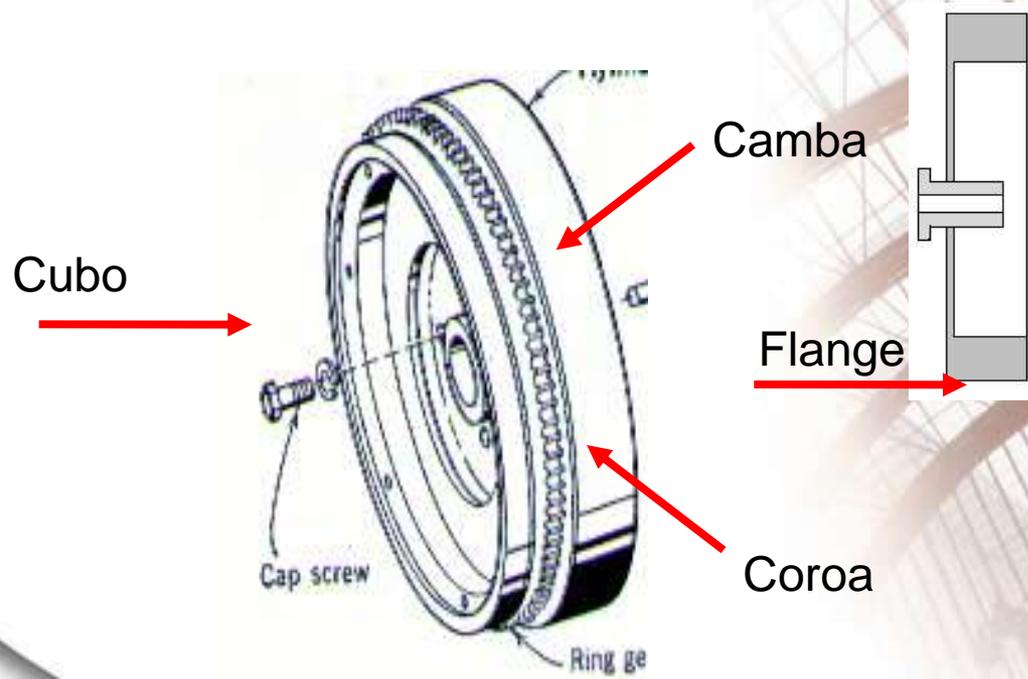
Crankshaft, flywheel, and related parts (Allis-Chalmers Mfg. Co.).
